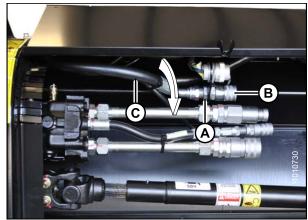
Auger and Reel Pressure Coupler and Hose – 18-Ft. Header Shown
